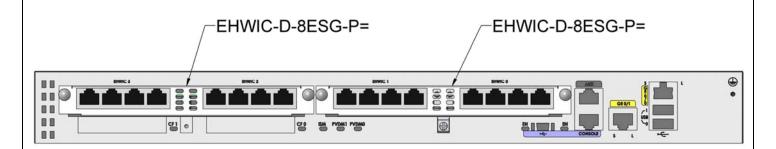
0226237-100, CISCO 2901 ROUTER, VIEW A-A (SHEET 5)
